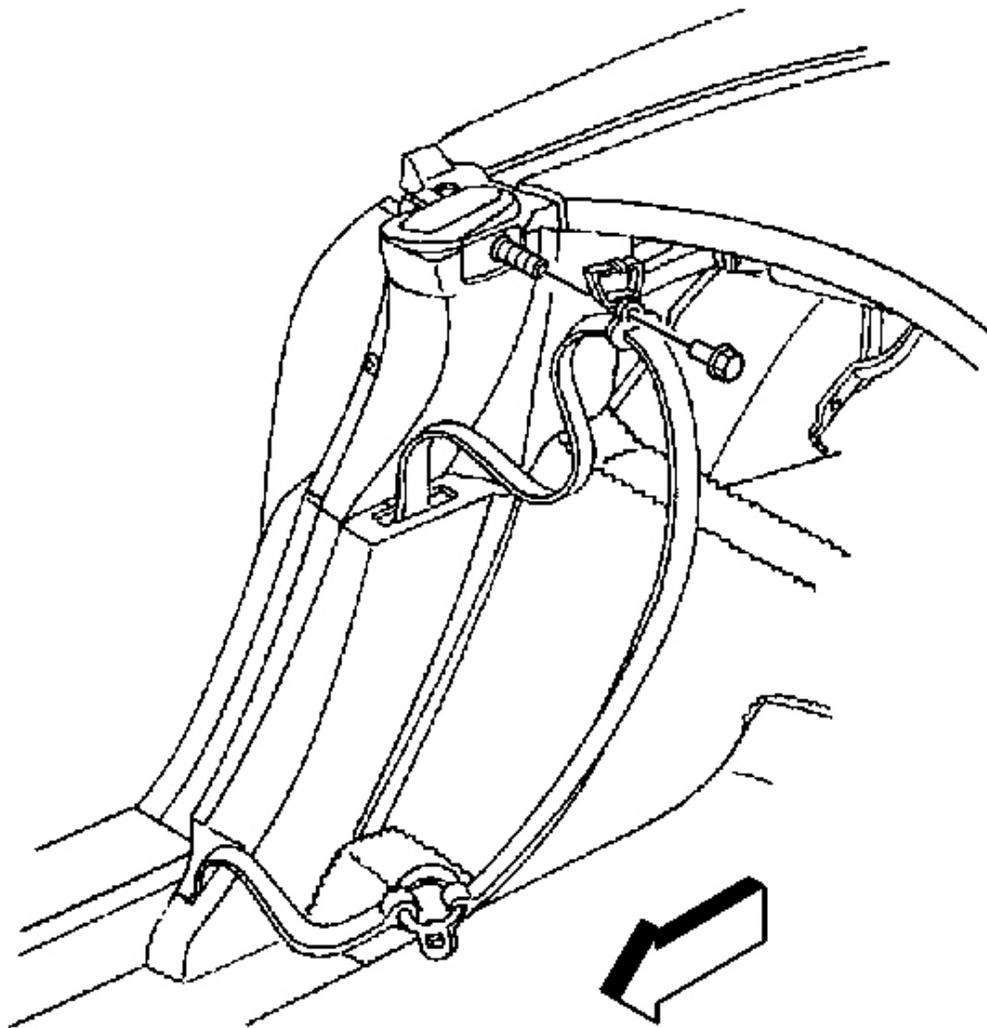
Seat Belt Guide Bracket Stud & Upper Guide
